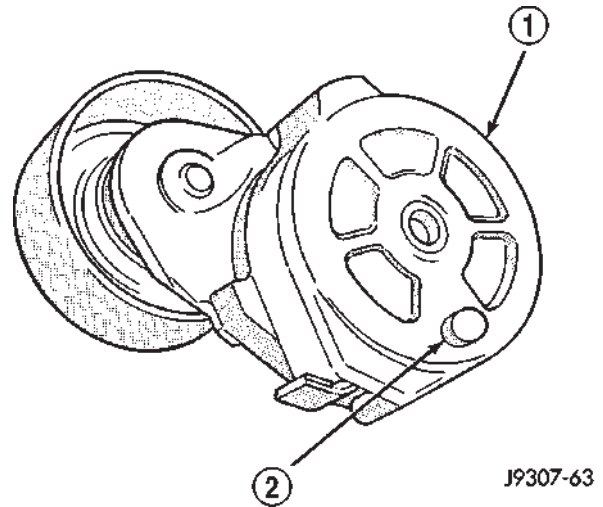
Tensioner Dowel Pin—5.9L HDC-Gas Engine
